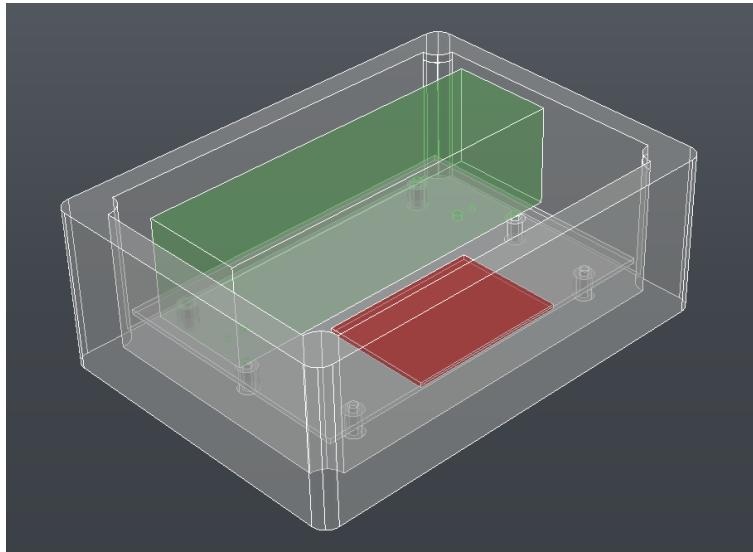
Complete Enclosure Body with Battery Holder (Green) and PCB (Red) Inside
